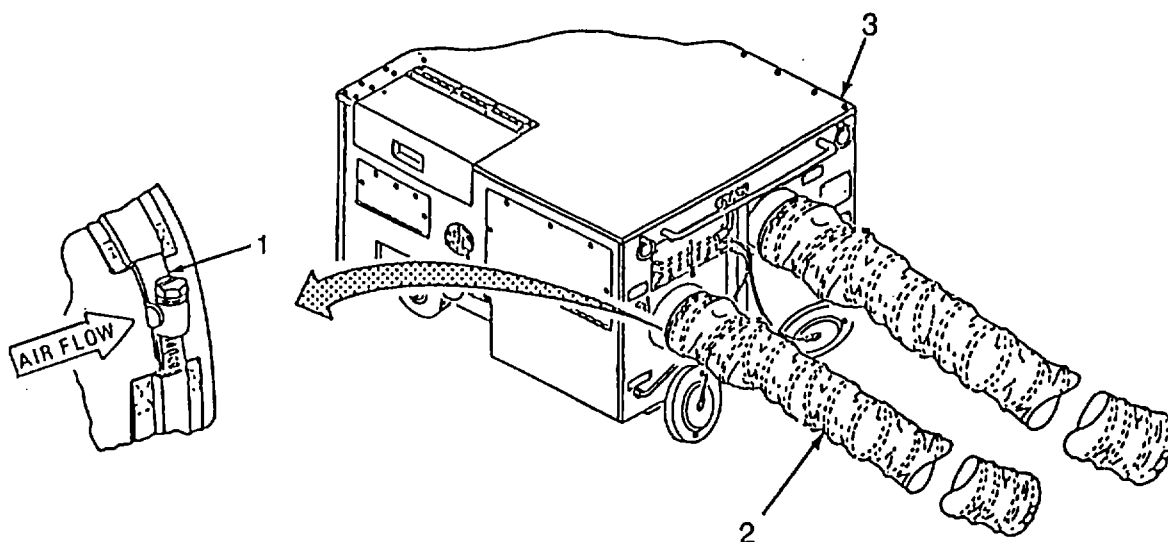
Duct Assembly (Sheet 1 of 2)
